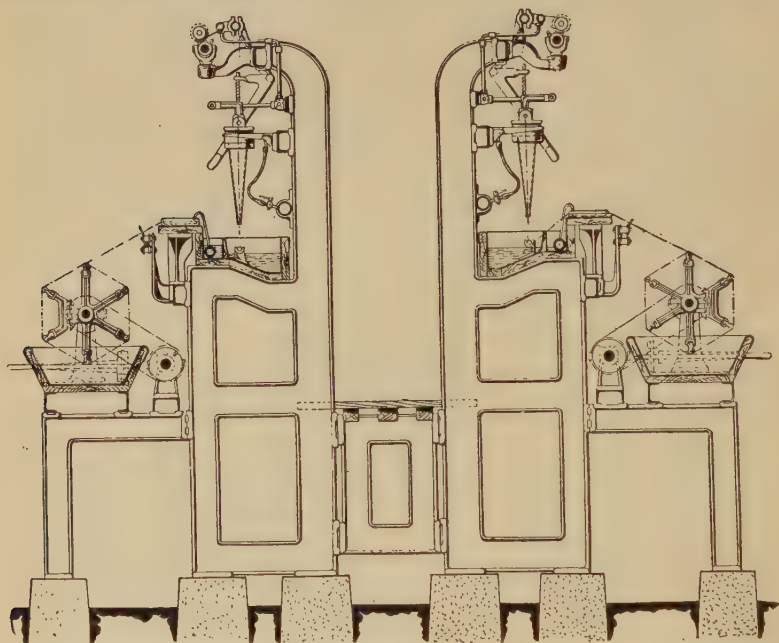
Reel Stretch Spinning Machine. (Courtesy of C. G. Haubold, A. G. Chemnitz, Germany.)
